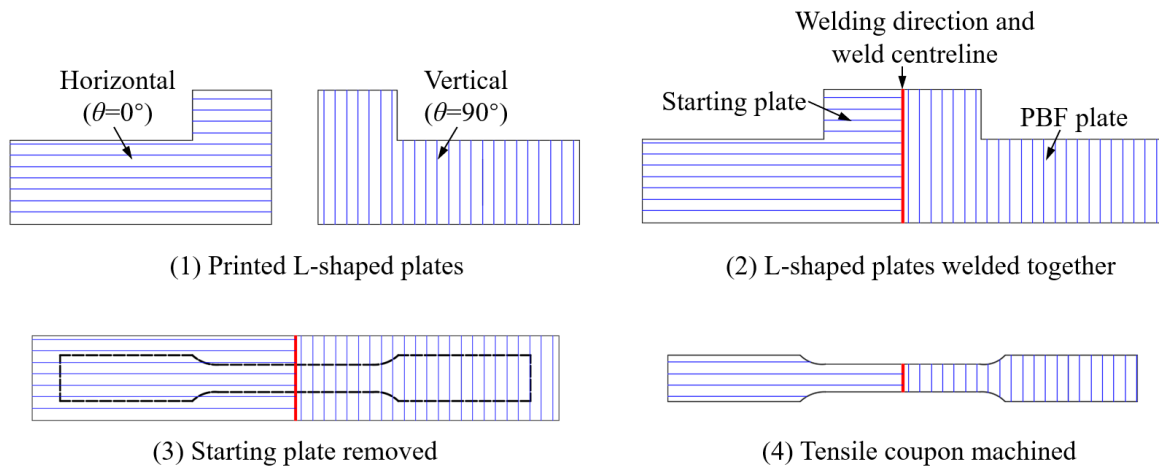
Laser welding and machining process for a combined X family tensile coupon
